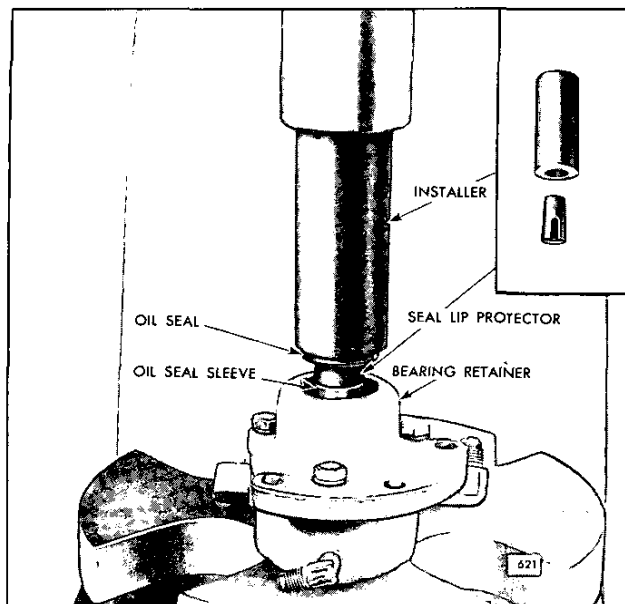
Installing Pump Shaft Oil Seal in Bearing Retainer
